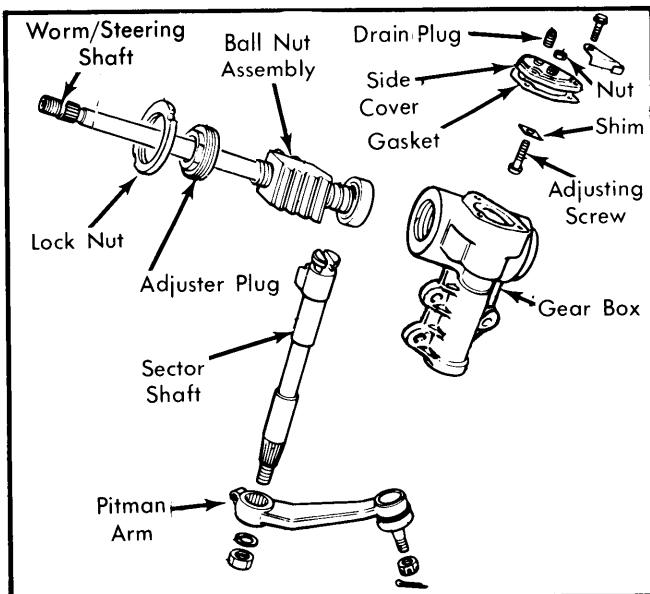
Exploded View of Steering Gear Assembly (GLC, 626 and RX7 Models)
